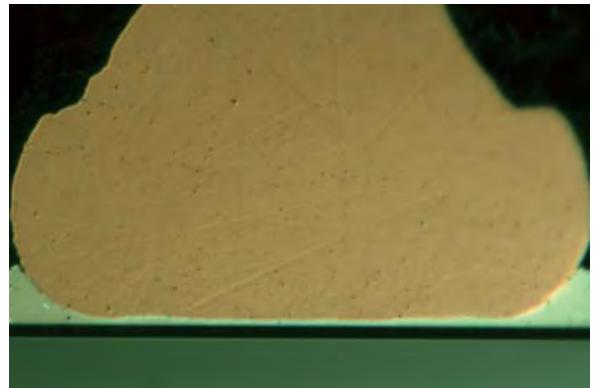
Cross-Section Cu Ball Bond on Al Pad.
